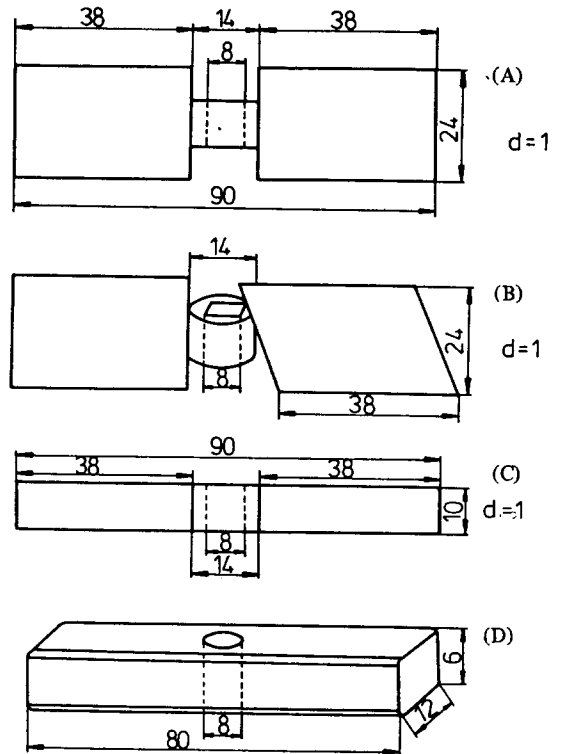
Shape and dimension of impellers; standard (A), twist (B), sharp (C), rod (D). (dimension; mm)
